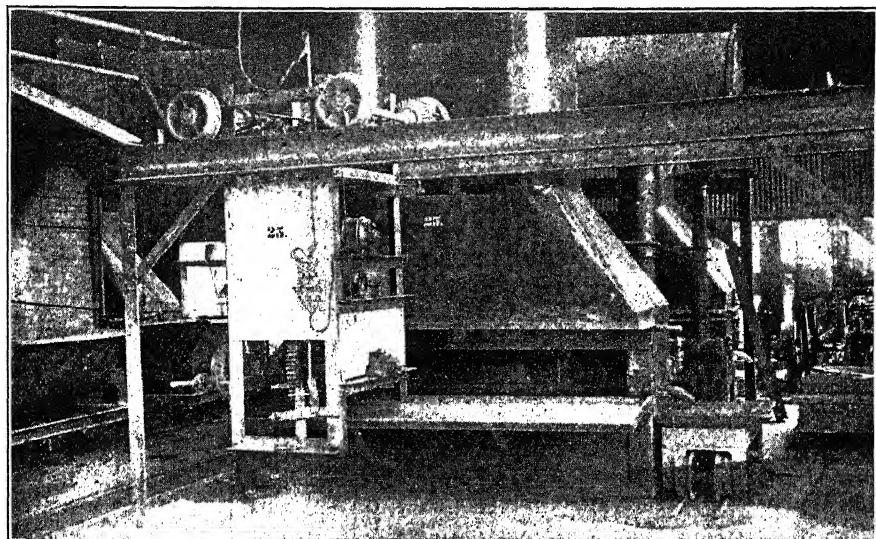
RABBING MACHINE AT BEGINNING OF TRIP.
